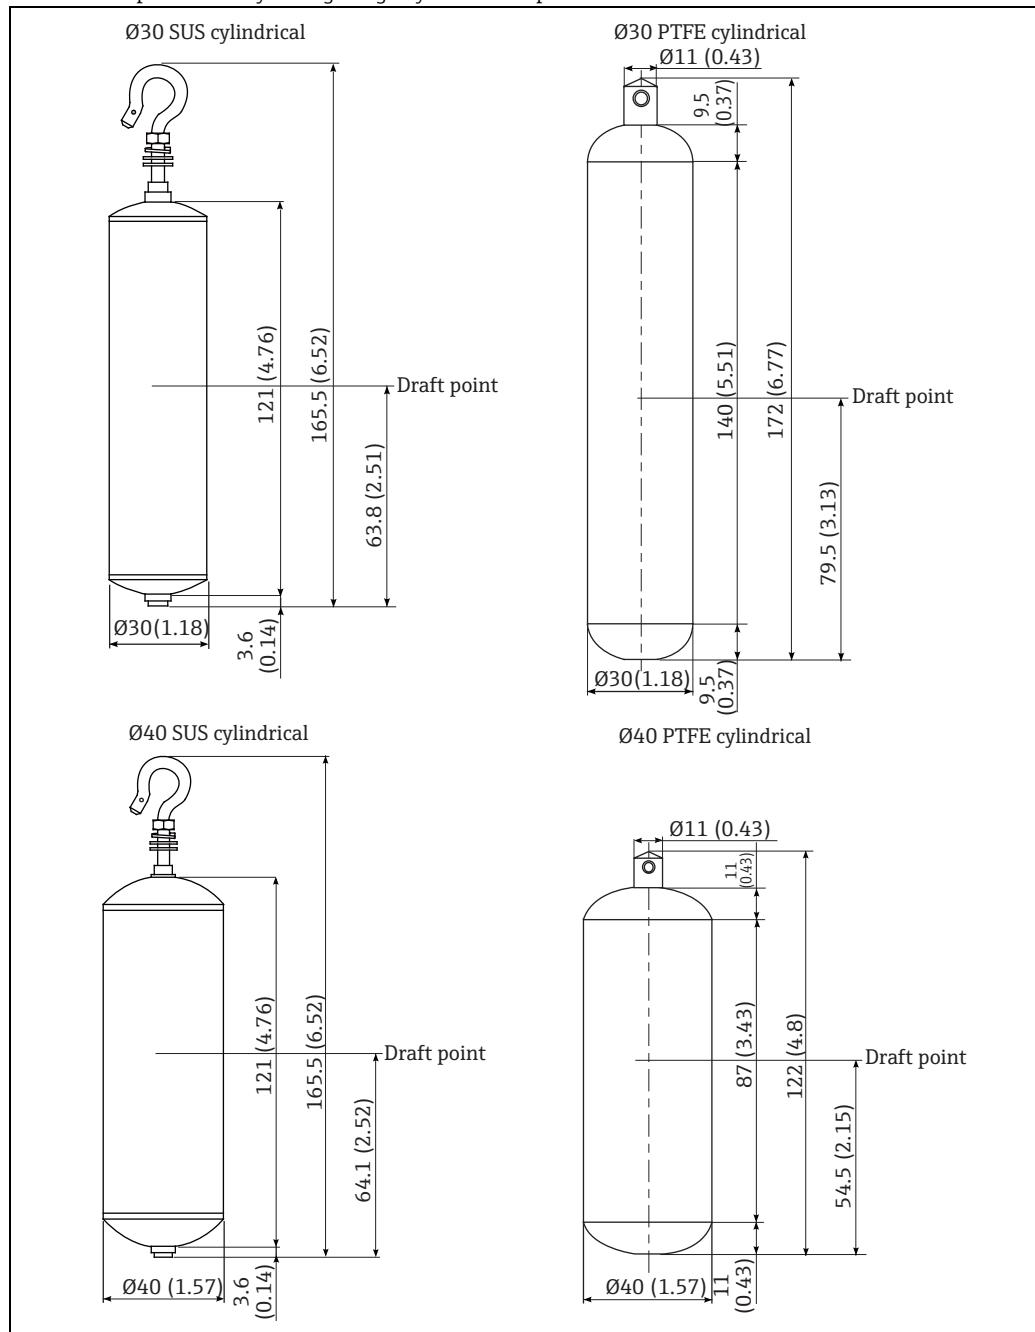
Dimension of Displacer 1, Unit of Measurement: mm (in)
